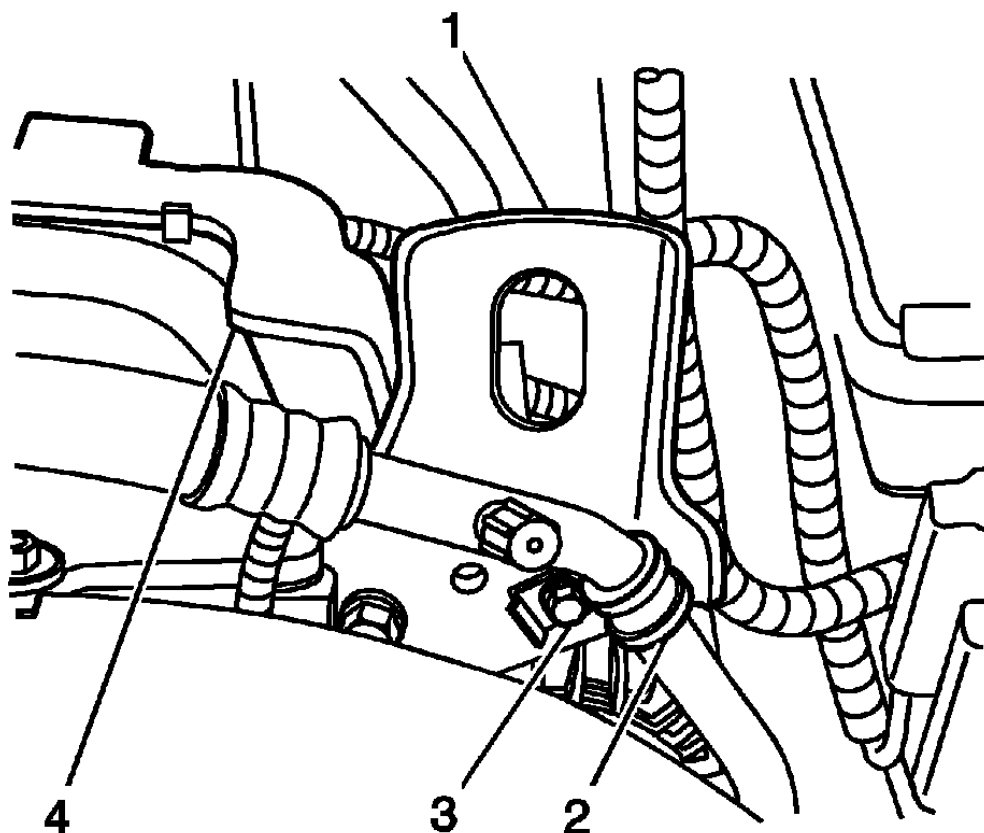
Identifying Heater Inlet Hose Quick Disconnect Fitting
